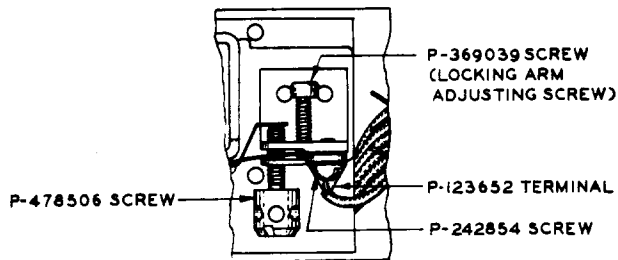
B NO. 267A AND 267B RELAYS EQUIPPED WITH A LOCKING ARM ADJUSTING SCREW.
